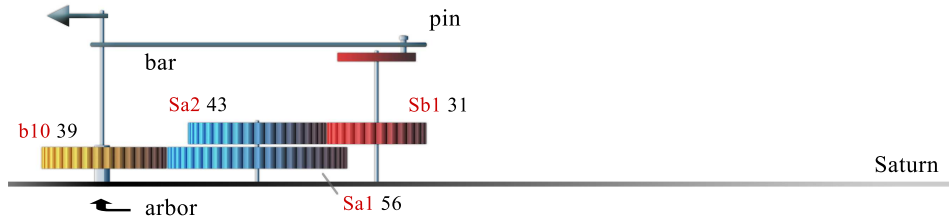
Side view of the optimized gearing schematic diagram of the Saturn epicycle gear train, starting with a 39-teeth fixed gear instead of a 32-teeth gear. Further properties are equal to Figure 7.23.
